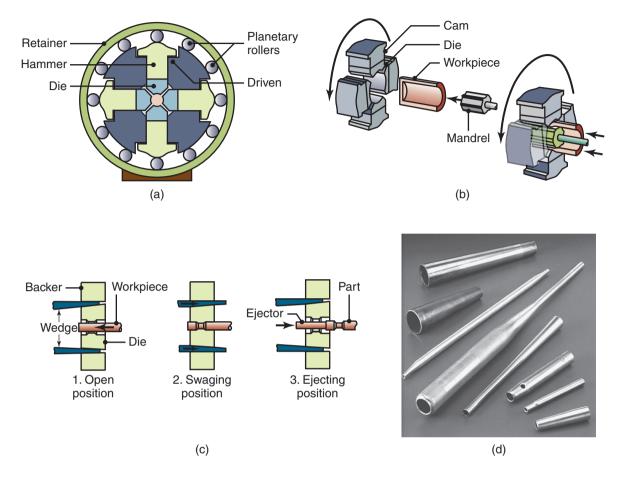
(a) Schematic illustration of the rotary-swaging process. (b) Forming internal profiles on a tubular workpiece by swaging. (c) A die-closing swaging machine, showing forming of a stepped shaft. (d) Typical parts made by swaging. *Source:* (d) Courtesy of Woodsage Holdings, LLC.
